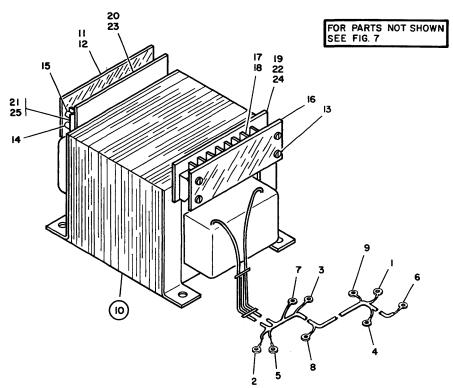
CABLE ASSEMBLY-FERRO REGULATOR. SEE LIST 14
